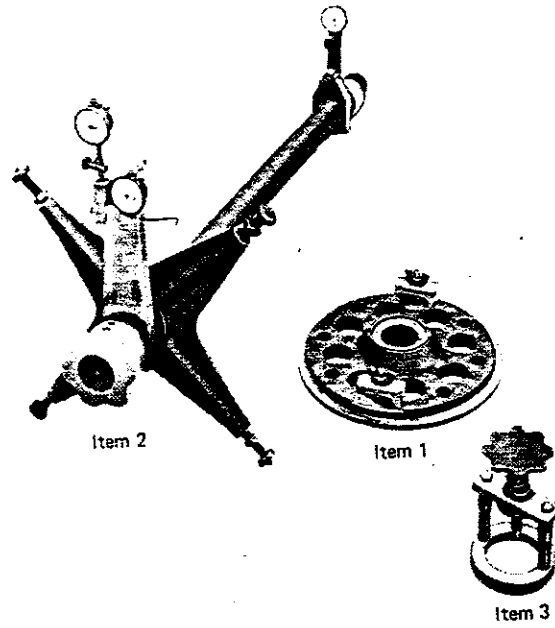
Armature Housing Bore Face Concentricity Gauge
